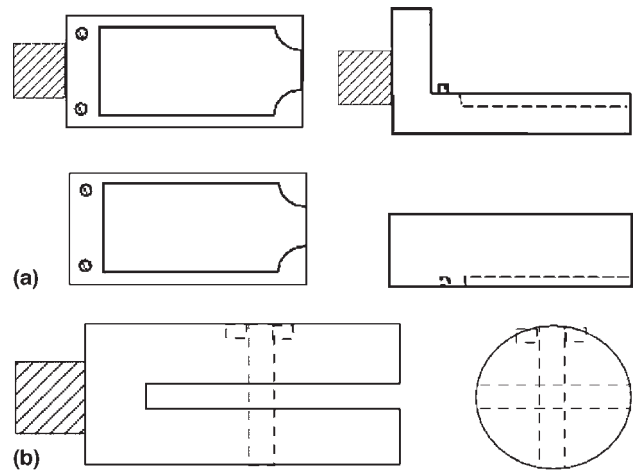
Mechanical clamping devices developed for testing CFRP laminates: (a) union by machining a bas relief of the specimen end; (b) union by bolt.
